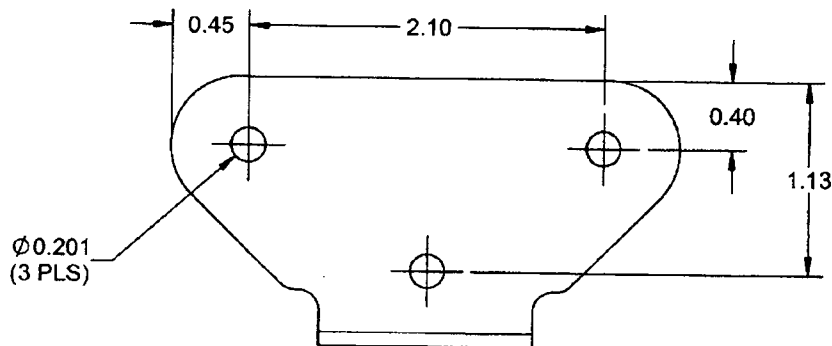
LOCATION OF D4330-3 DOOR BRACKET MOUNTING HOLES (SPACEDOOR™)
